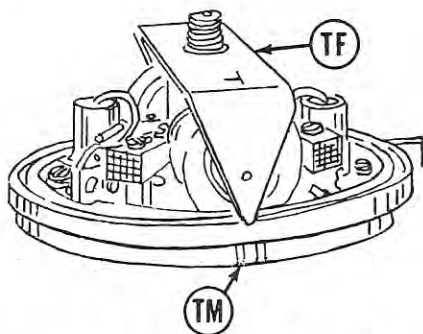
Timing fixture (TF) installed and aligned with armature plate timing marks (TM) for adjusting points for the upper cylinder. Refer to text.
